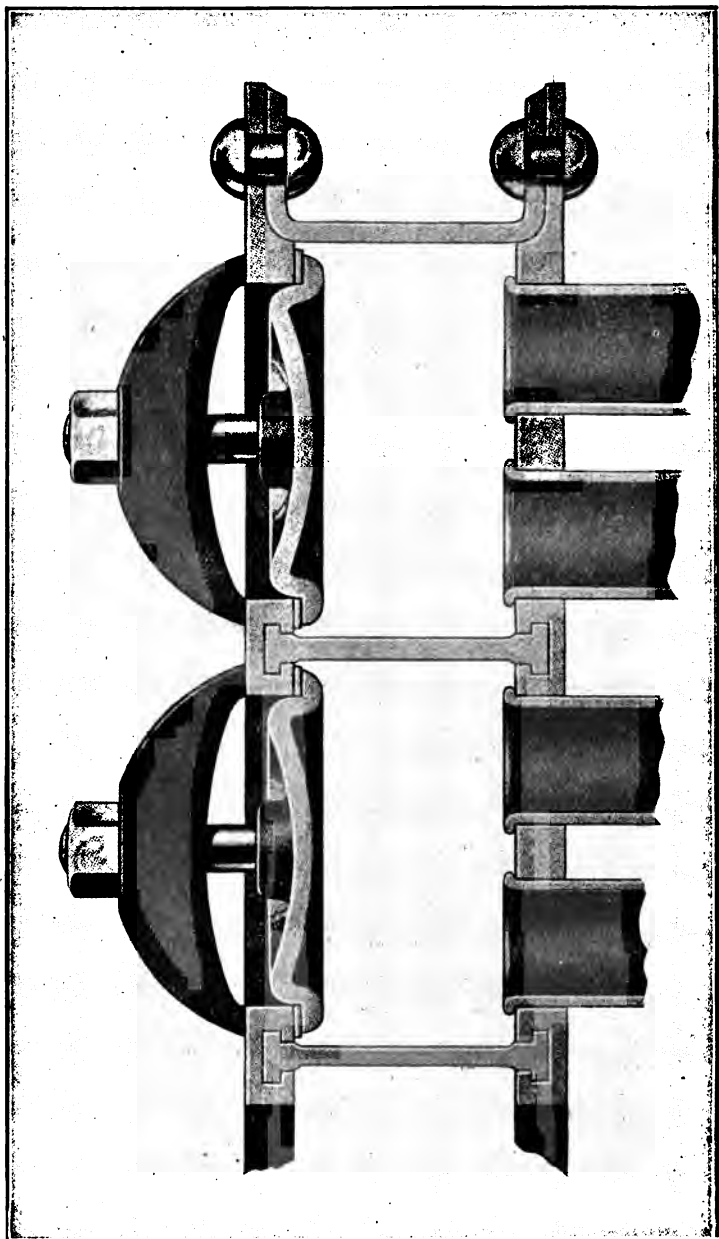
Section through header, showing method of staying tube and hand-hole sheets,
